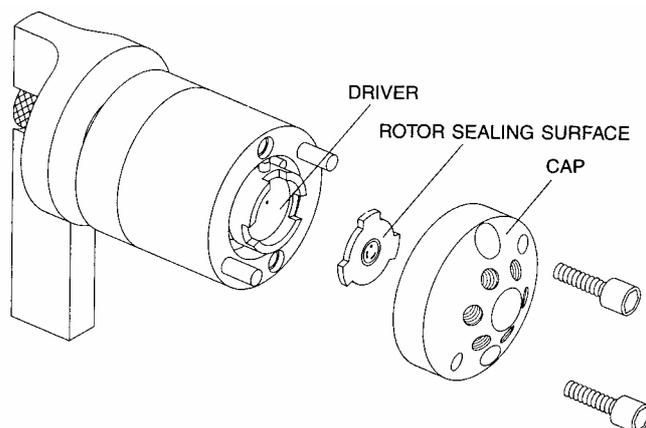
Exploded View of the Valco Model C1 Valve
